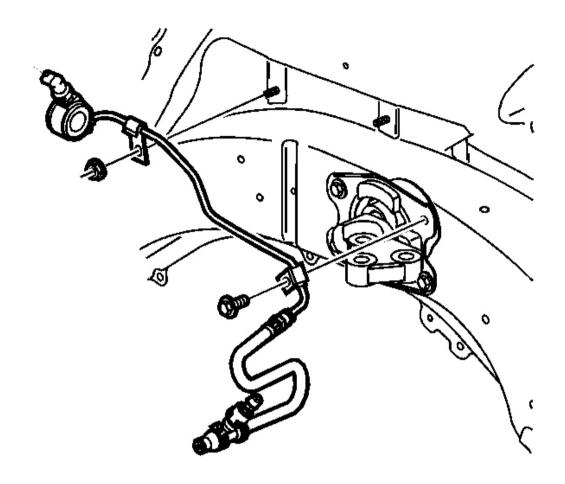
Clutch Pedal Retainer, Nuts & Bolts Courtesy of GENERAL MOTORS CORP.
